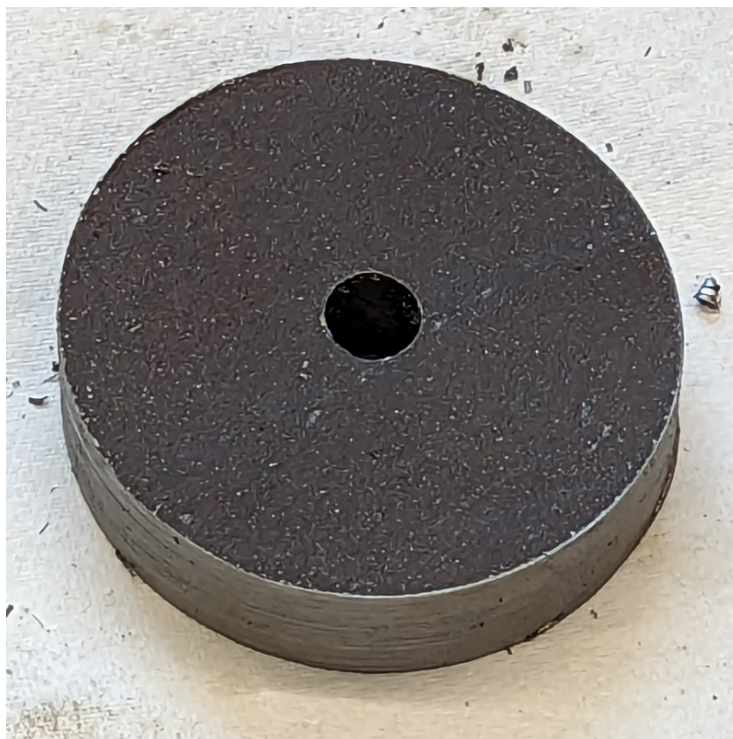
Image of samples after being sectioned using the hole saw and drill press. Circular cutouts were 3" in diameter.
